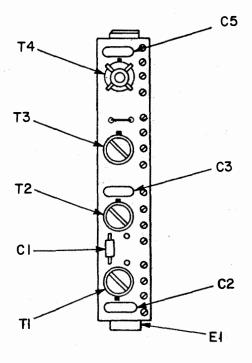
7 MHz Subassembly A2A4A25, Component Locations
